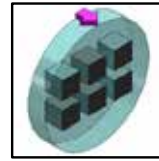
Schematic drawing showing the positions of the cube samples extracted from the TQ1 cylinder block with wire erosion method in dimensions of 20x20x20 mm.
